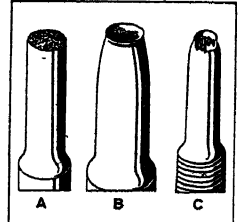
MILD STEEL SPECIMEN FRACTURES BY TENSION
